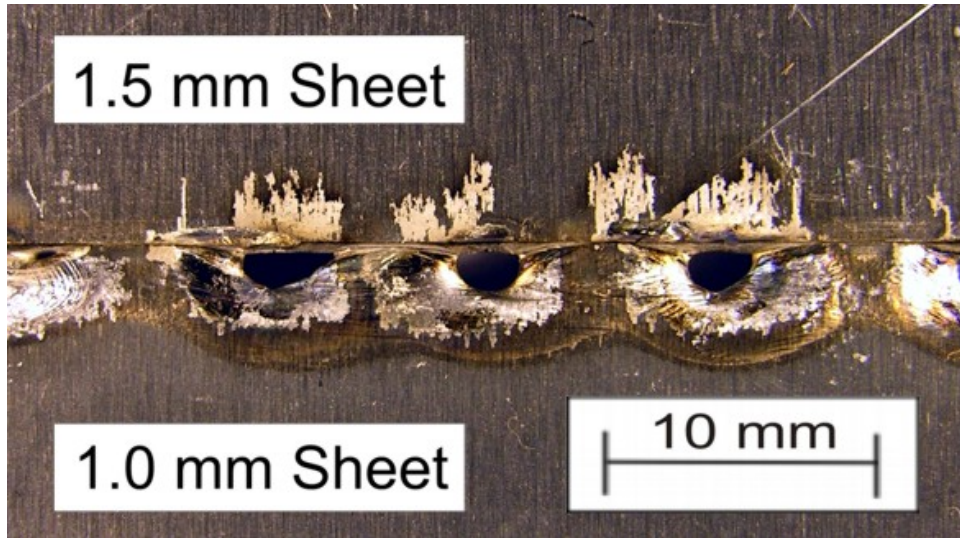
Top weld surface produced with welding torches offset 1 mm towards the 1.0 mm thick sheet resulting in blowholes using a net heat input of 75 J/mm.
